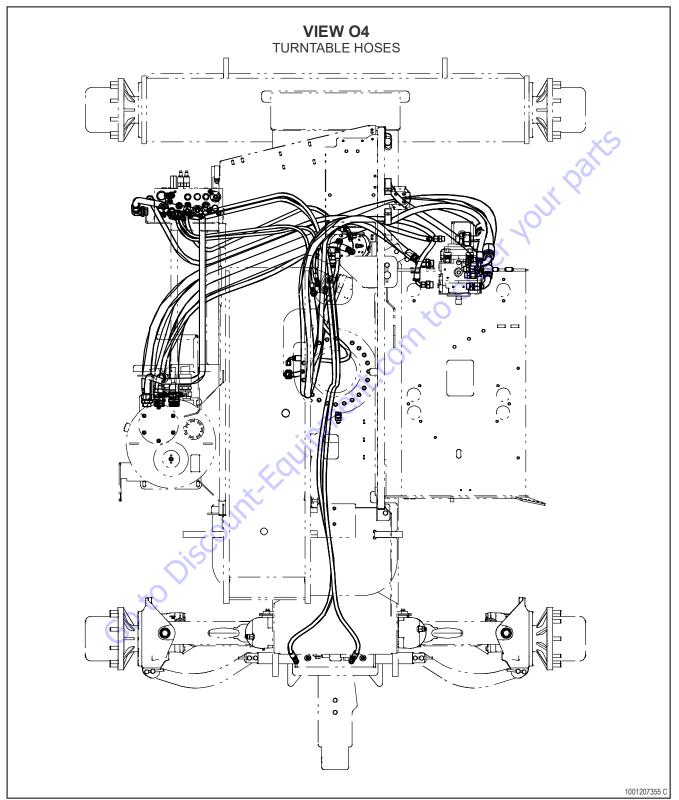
Hydraulics Installation - Sheet 20 of 28
